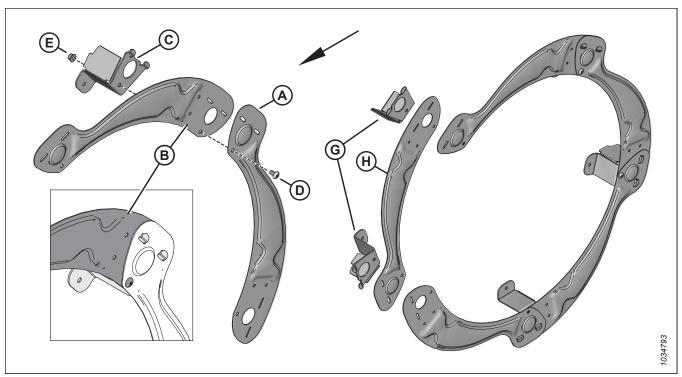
Five-Bat Reel - Initial Endshield Assembly
